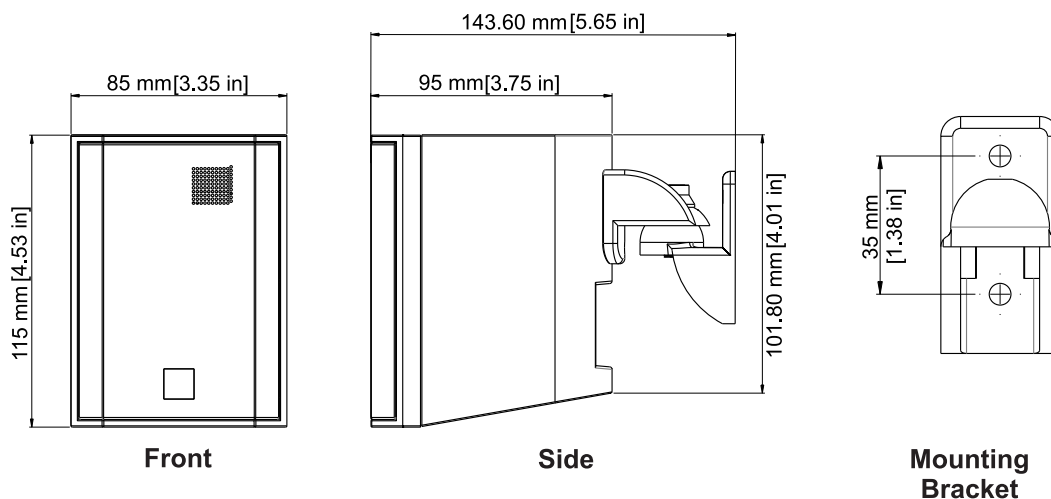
Dimensions EVID 2.1 and mounting bracket
